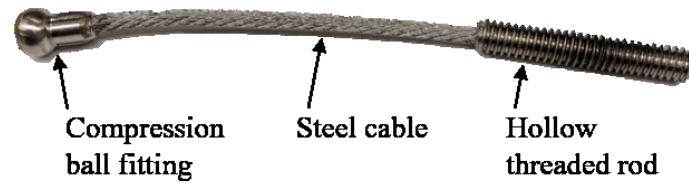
PII neck steel cable assembly (compression ball fitting, steel cable, and hollow threaded rod) to achieve consistent cable tension during dynamic impacts.
